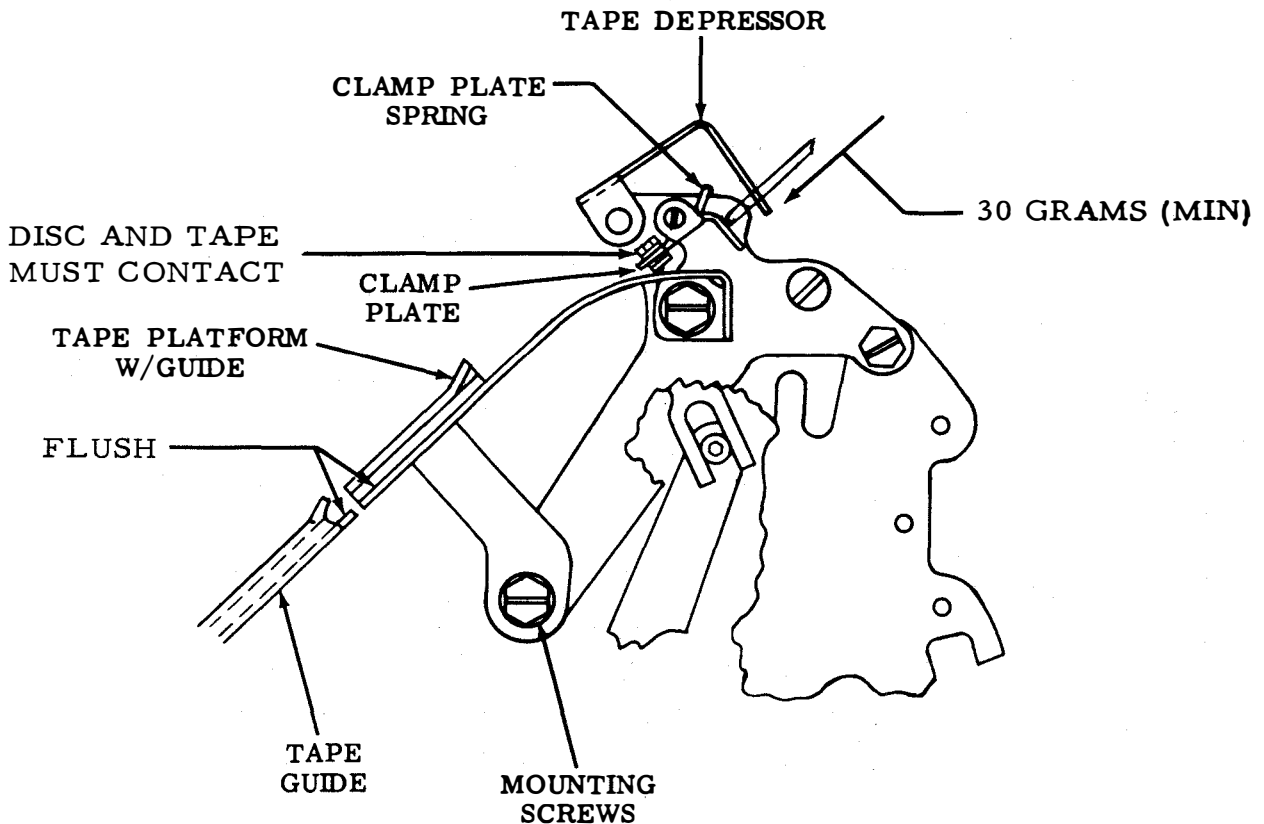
Clamp Plate Screw with Disc, Clamp Plate Spring and Tape Platform
